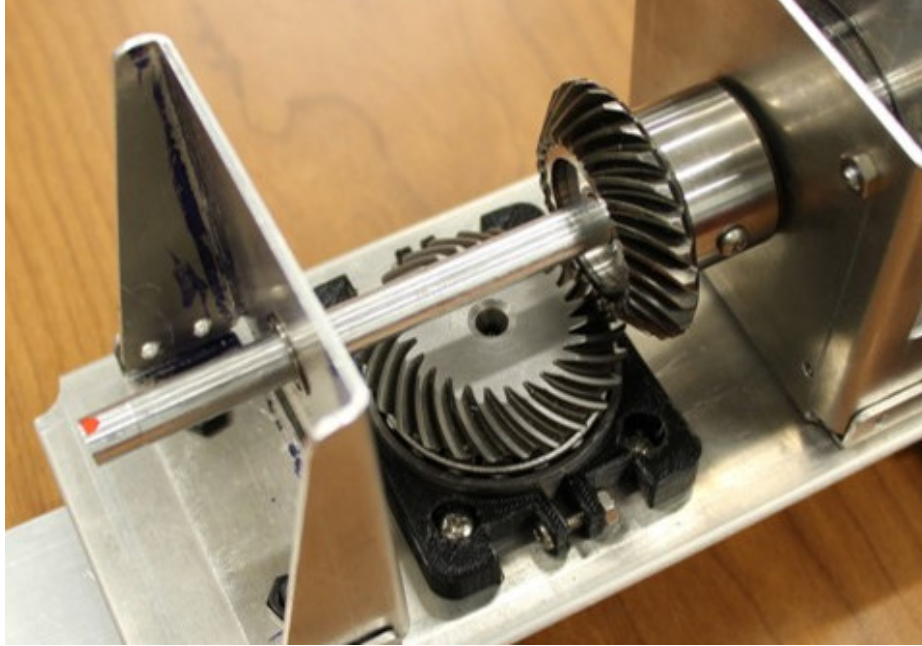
Spiral bevel gear with 1:1 gear ratio.
